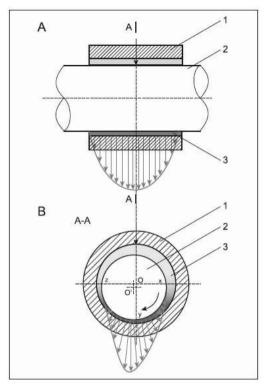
The mechanism of hydrodynamic lubricating; A- the longitudinal section of a slide bearing, B- the cross section of a slide bearing, 1- a bearing shell, 2- a shaft, 3- a lubricant
